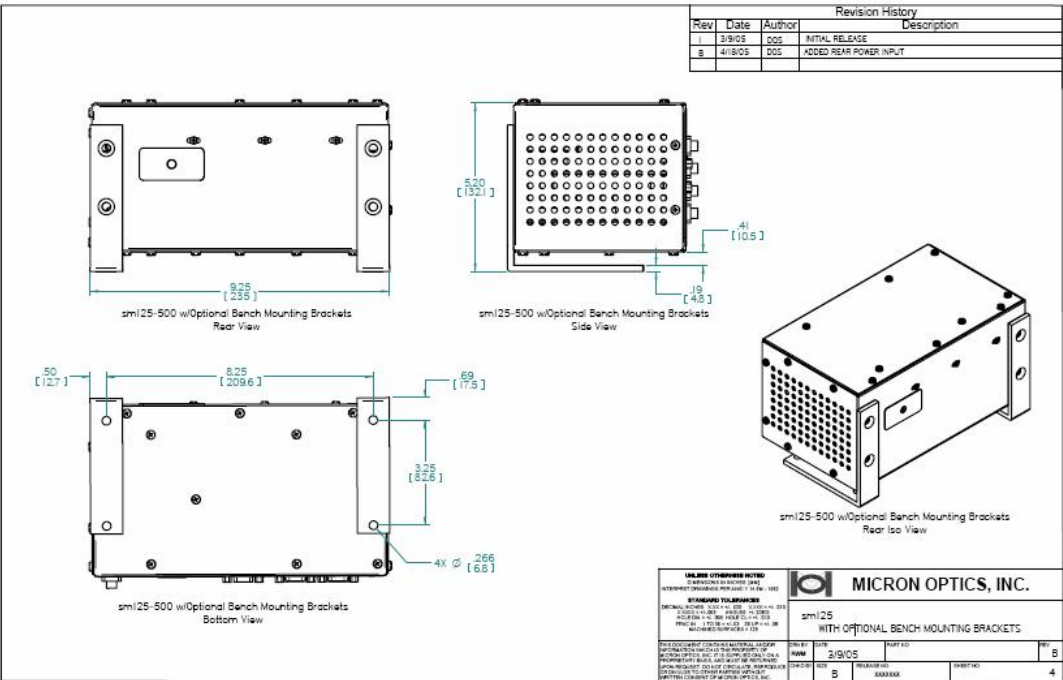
Mounting Option 2: Angle Mounting Bracket
